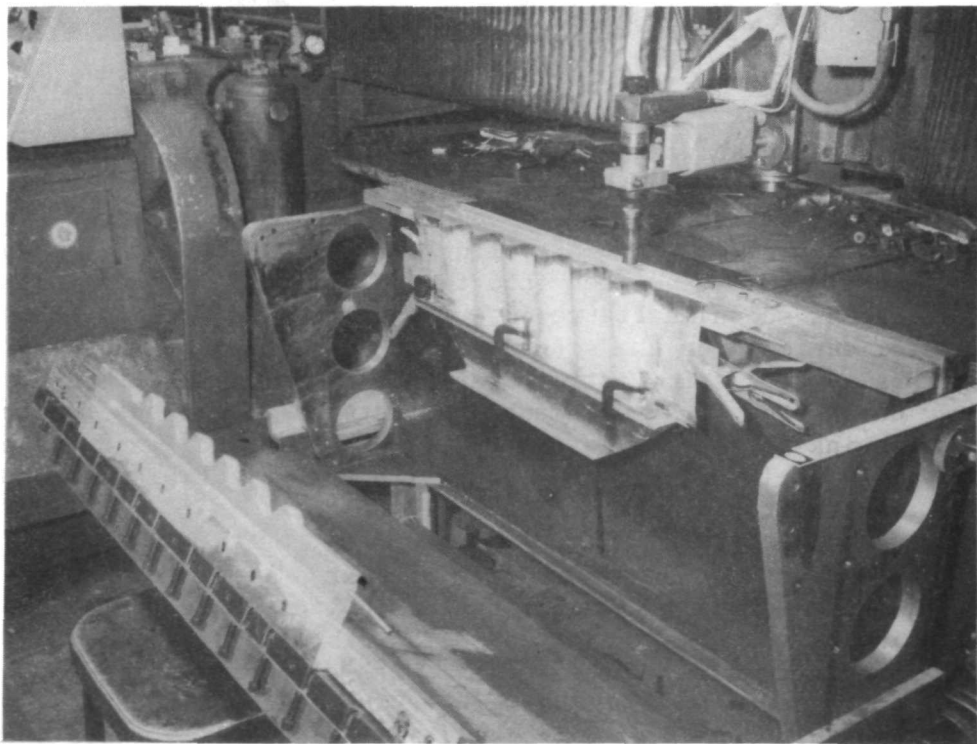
Open View of the Master Weld Fixture Showing the Clamping Arrangement Necessary to Fitup the Opposite Cap for Welding
